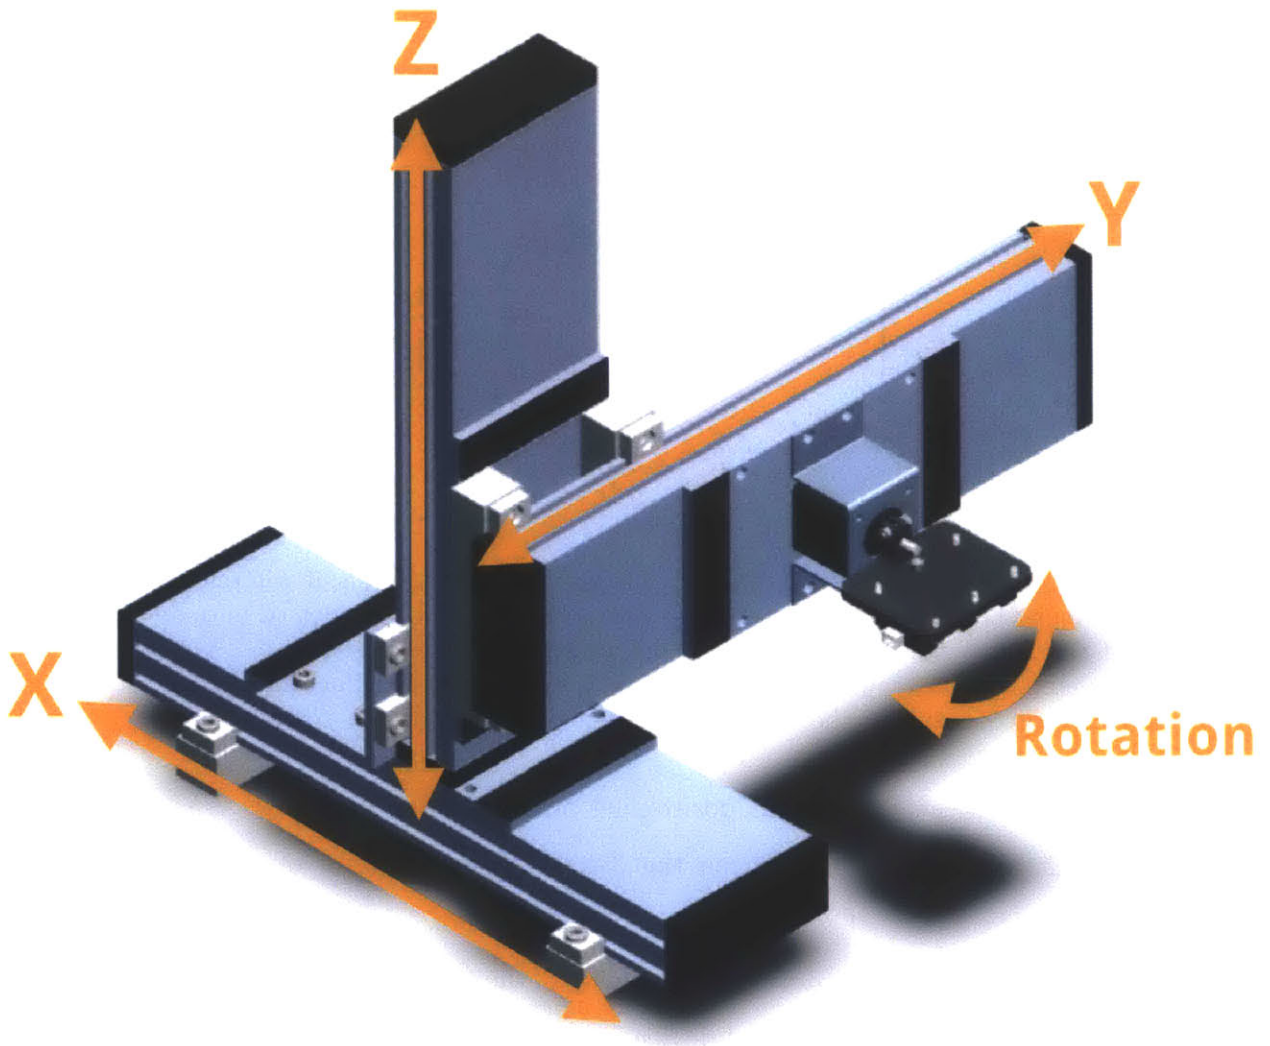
Complete Solidworks assembly of the robot design. The arrows depict the intended motion for each degree of freedom. The motors and their attachments are not included in the assembly.
